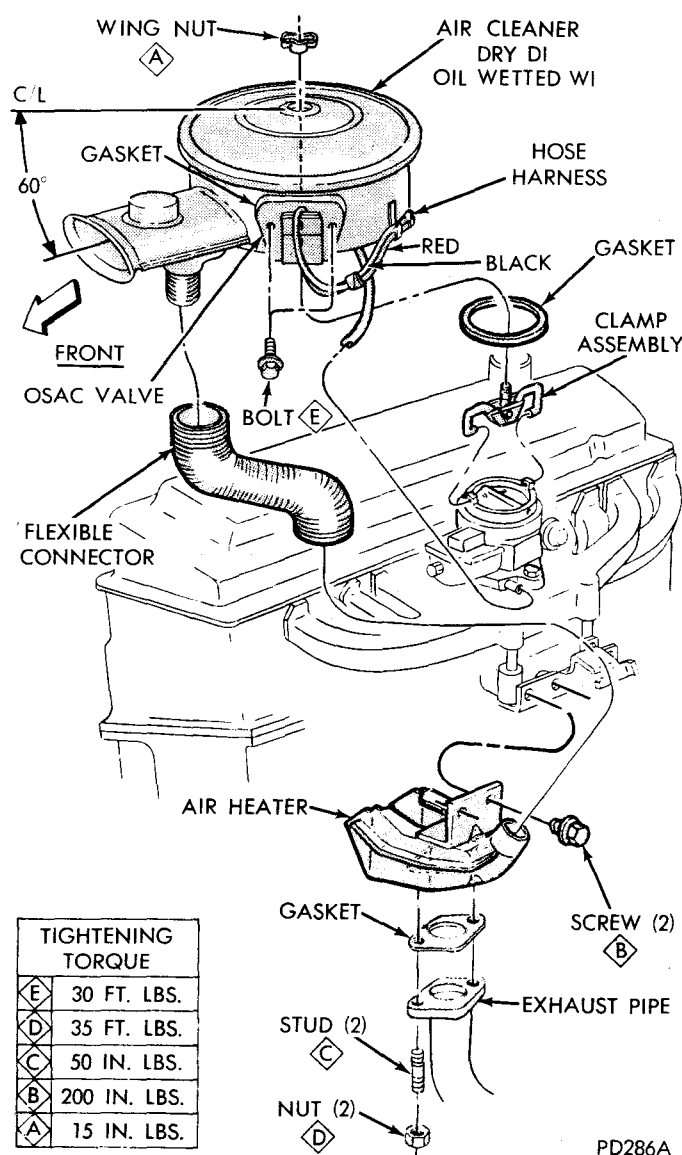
Carburetor Air Heater and Air Cleaner Six Cylinder Engines (D100 and W100)
